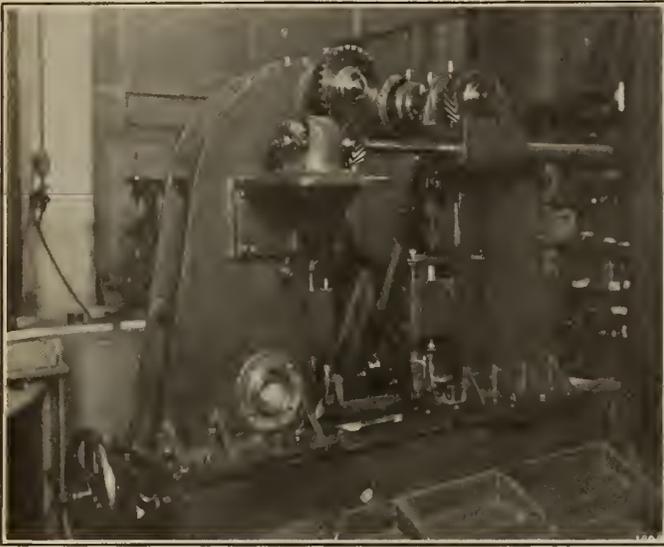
Special Automatic Spot-Welder; Frame Made of Welded Steel.
